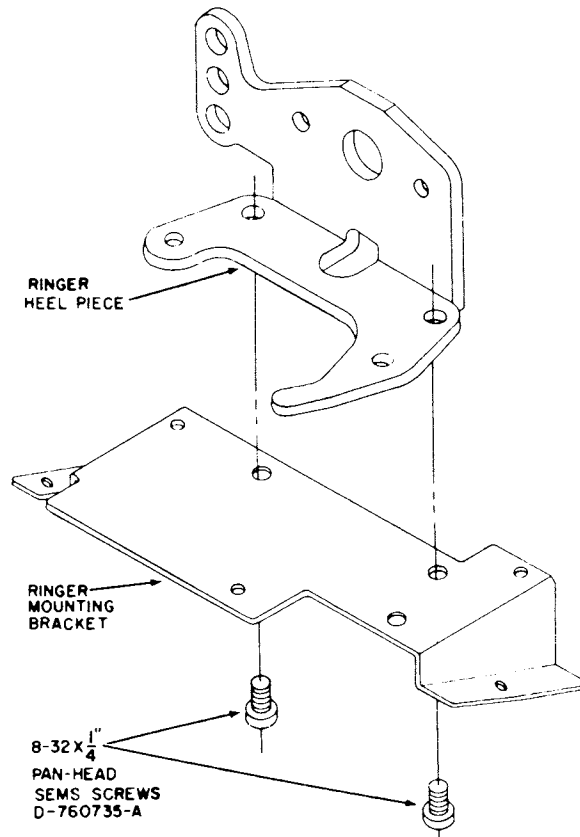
Attaching Ringer Mounting Bracket to Ringer.
